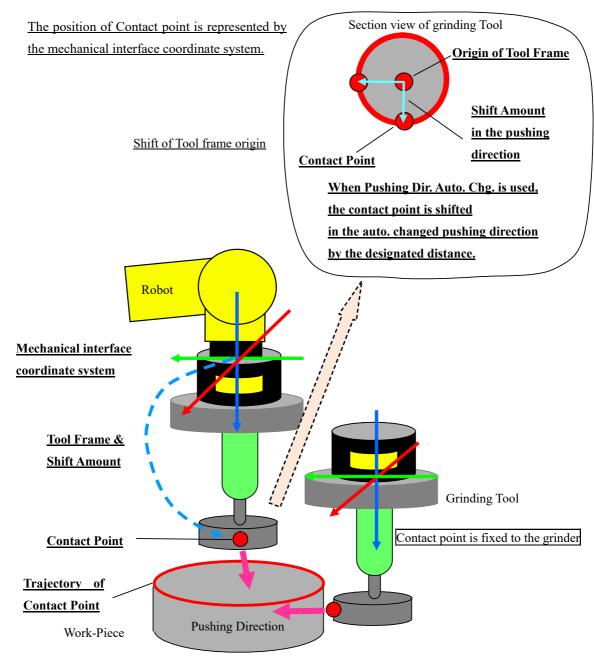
(g) Example 3 of setting TOOL to "3-Axis FS ContactP. Position"
